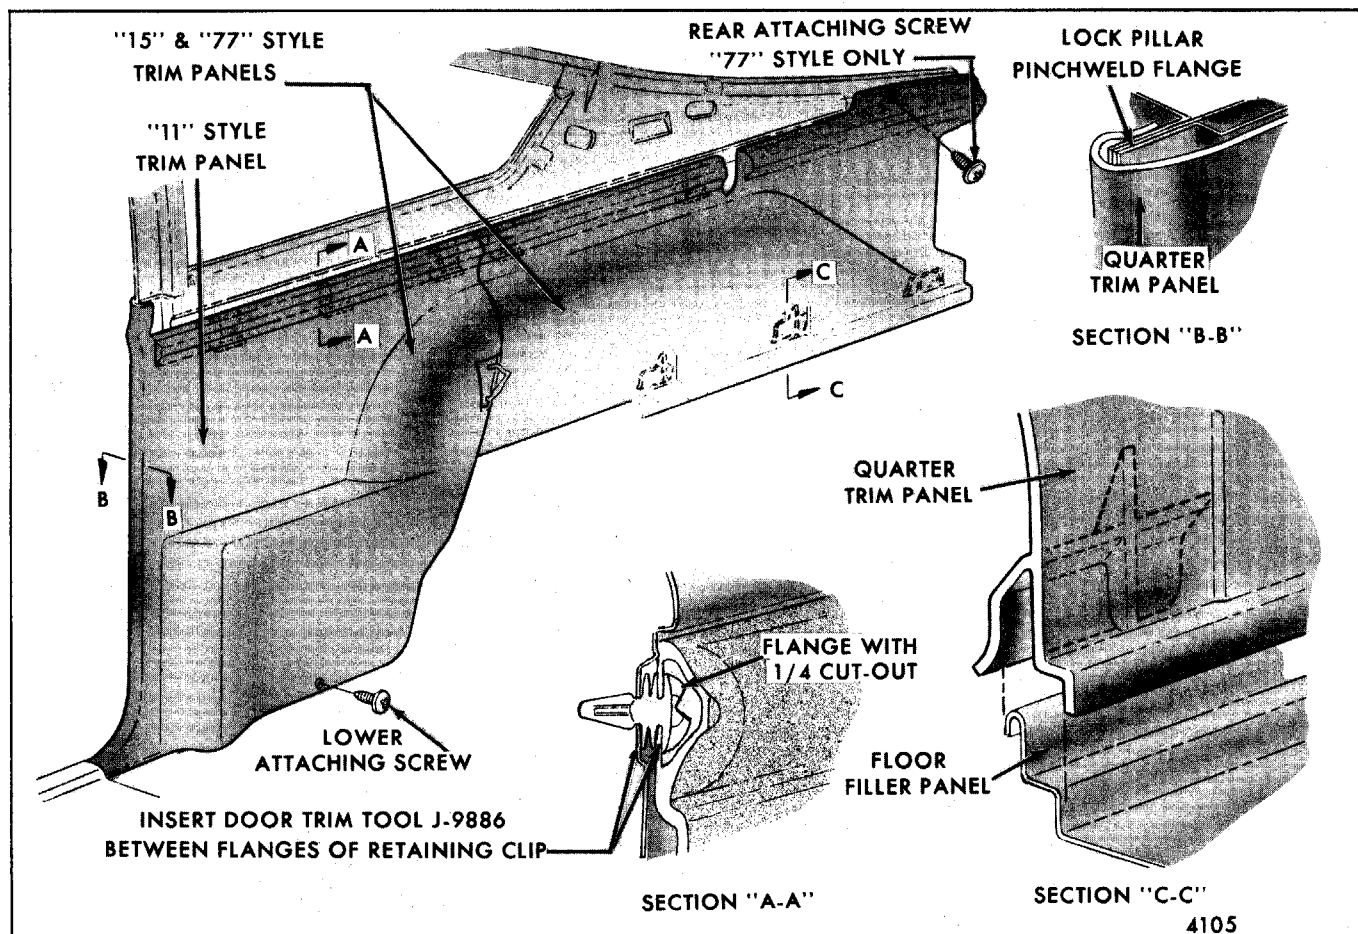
"H-11,15 and 77" Rear Quarter Trim Assembly ("H-07" Similar)
